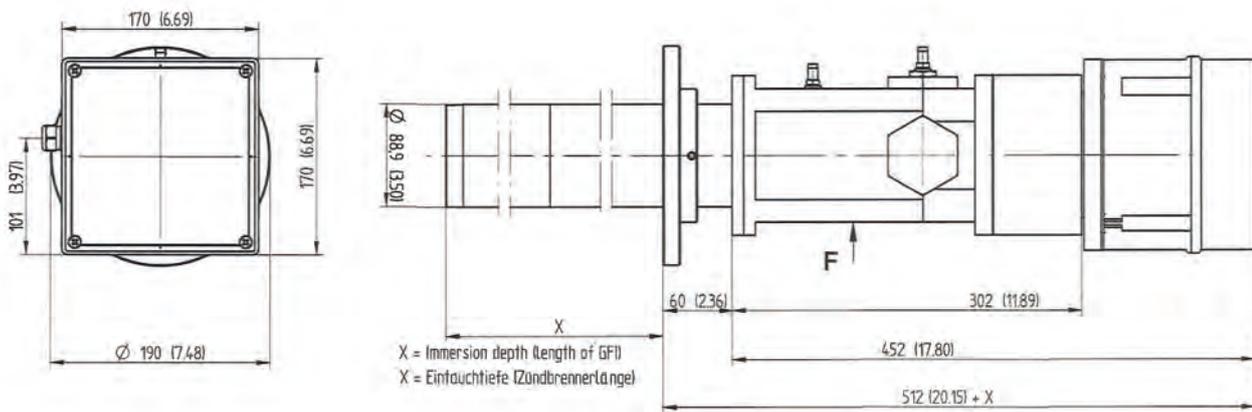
Dimensions of GF189 pilot burner Ex-Zone 2
